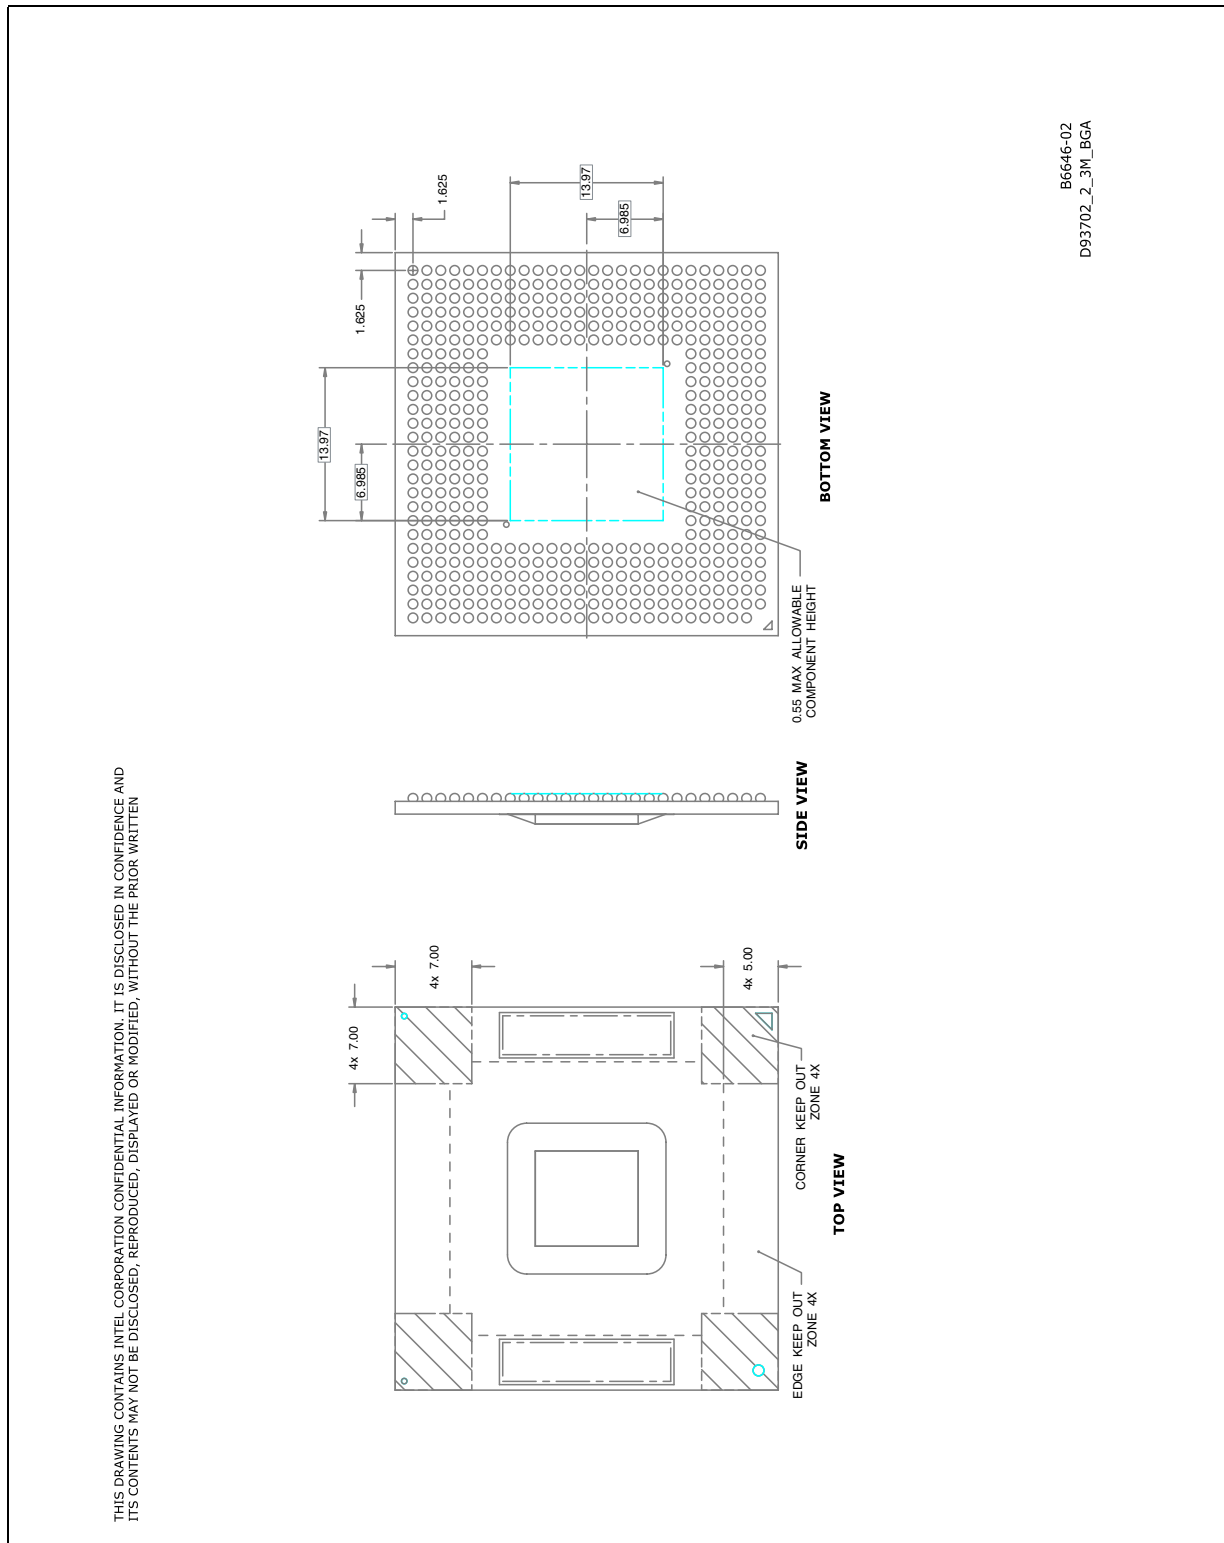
3-MB Micro-FCBGA Processor Package Drawing (Sheet 2 of 2)
